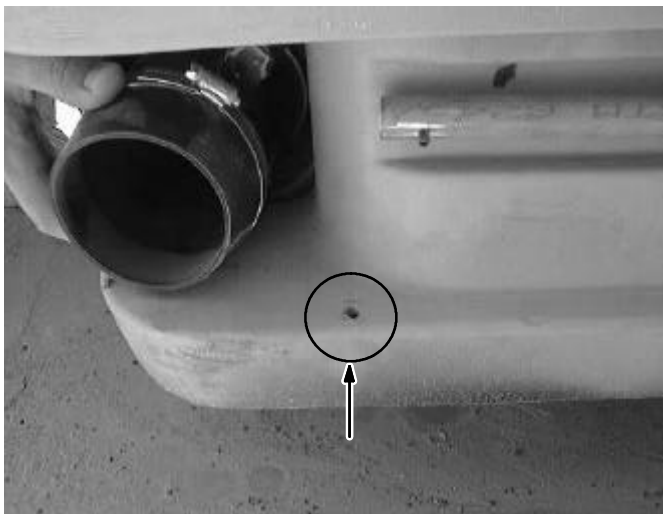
MIDDLE DOOR MOUNTING HOLE LOCATION
